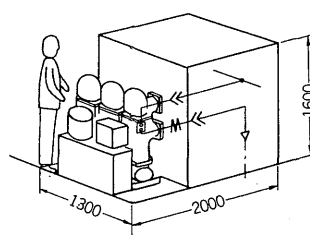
Outline dimensions of the 36kV Fuji Mini F-clad
